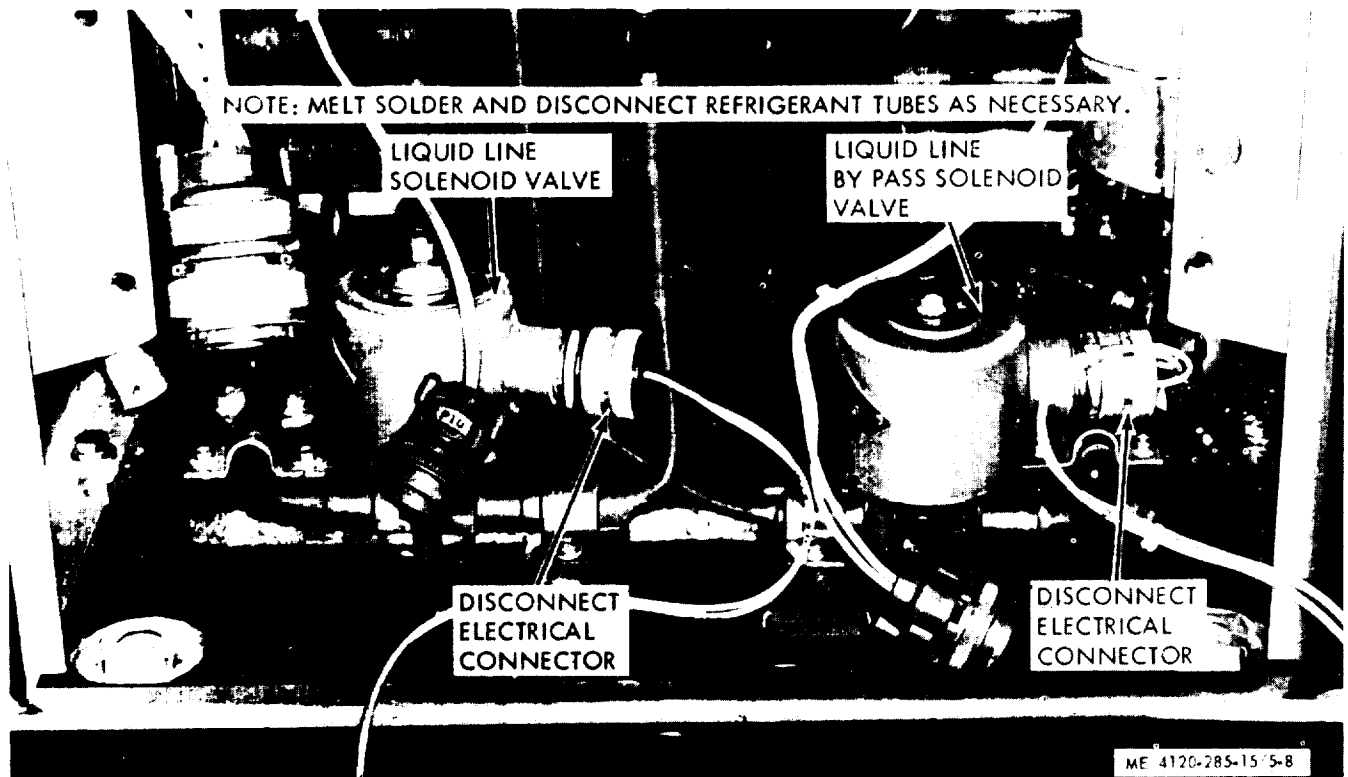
Liquid line solenoid valve and liquid line bypass solenoid valve, removal and installation.
